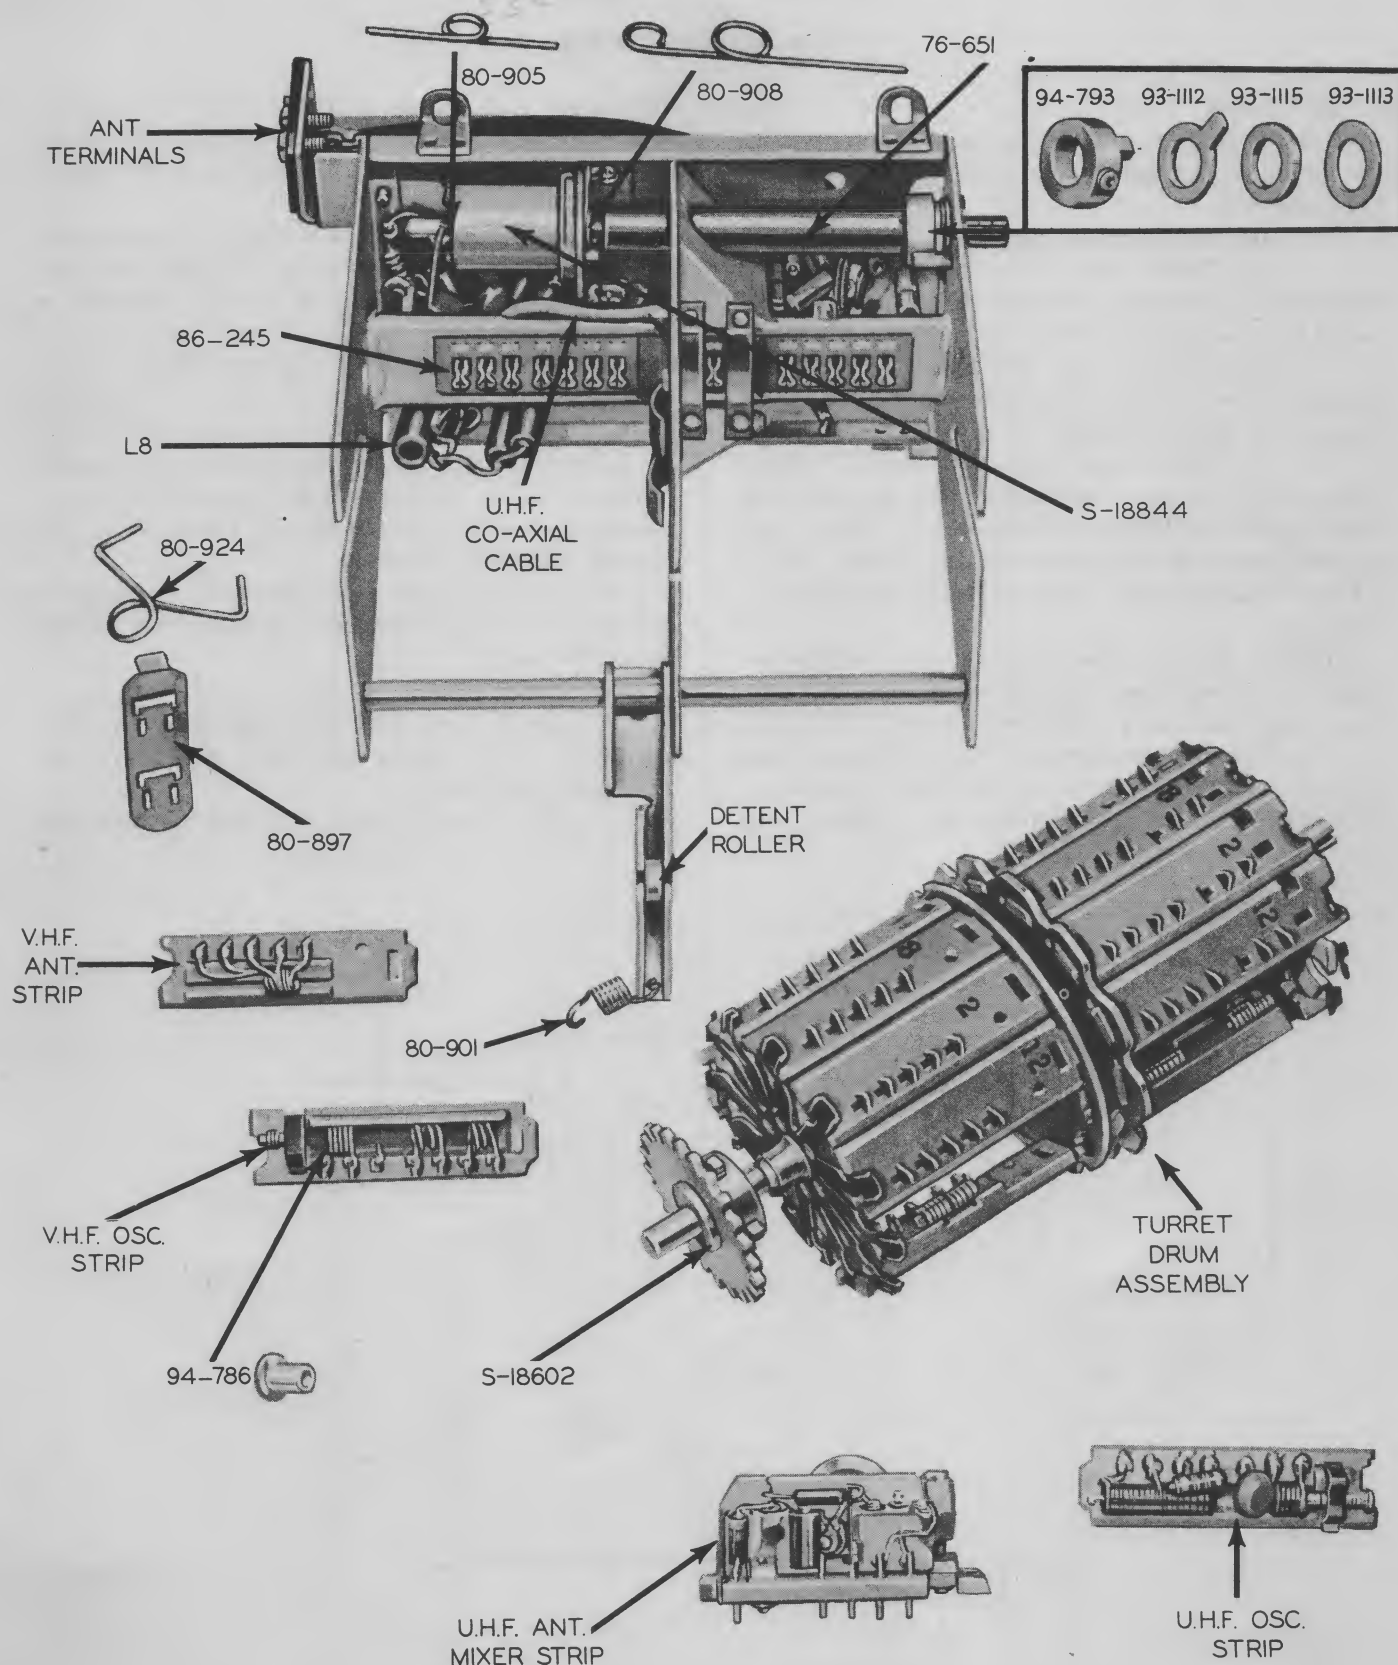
Exploded view of turret tuner: Zenith 19L27.
